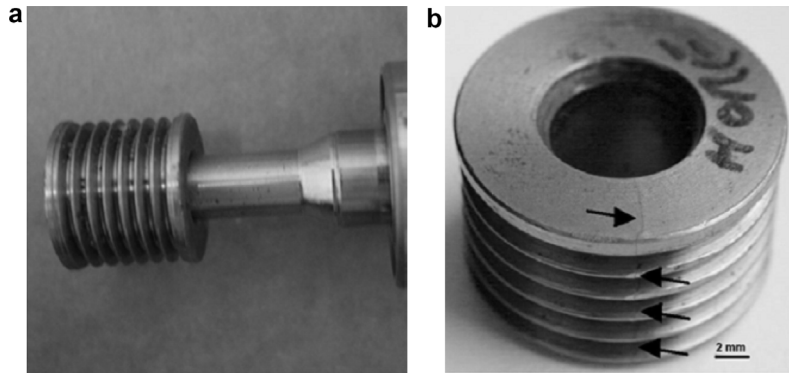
(a) Assembled pulley on shaft and (b) fracture of pulley.
